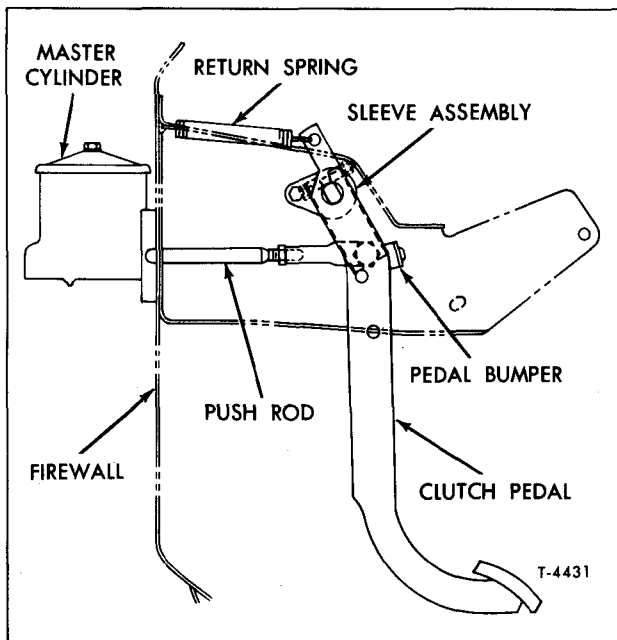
Clutch and Master Cylinder Installation (Conv. Cab Models)
